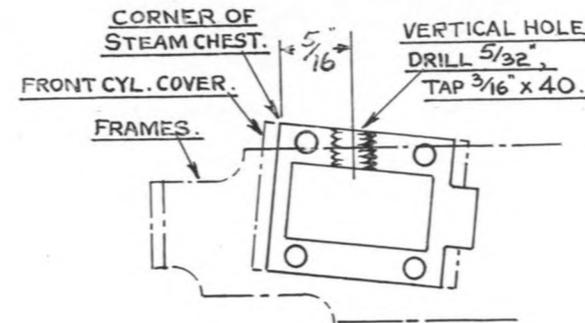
Showing the position of the steam entry hole in the steam-chest, drilled with the cylinder-block in the frames.
